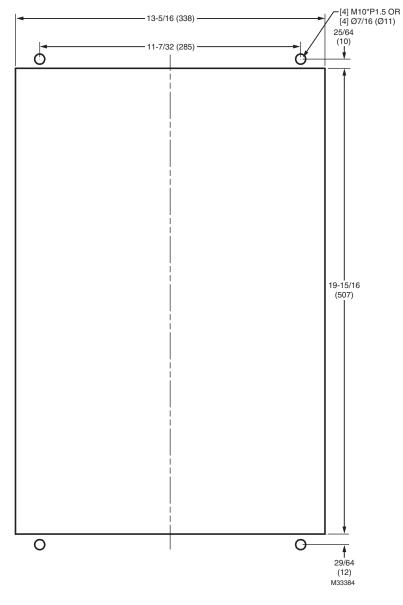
Panel Cutout Diagram Frame D: Unit in in. (mm)
